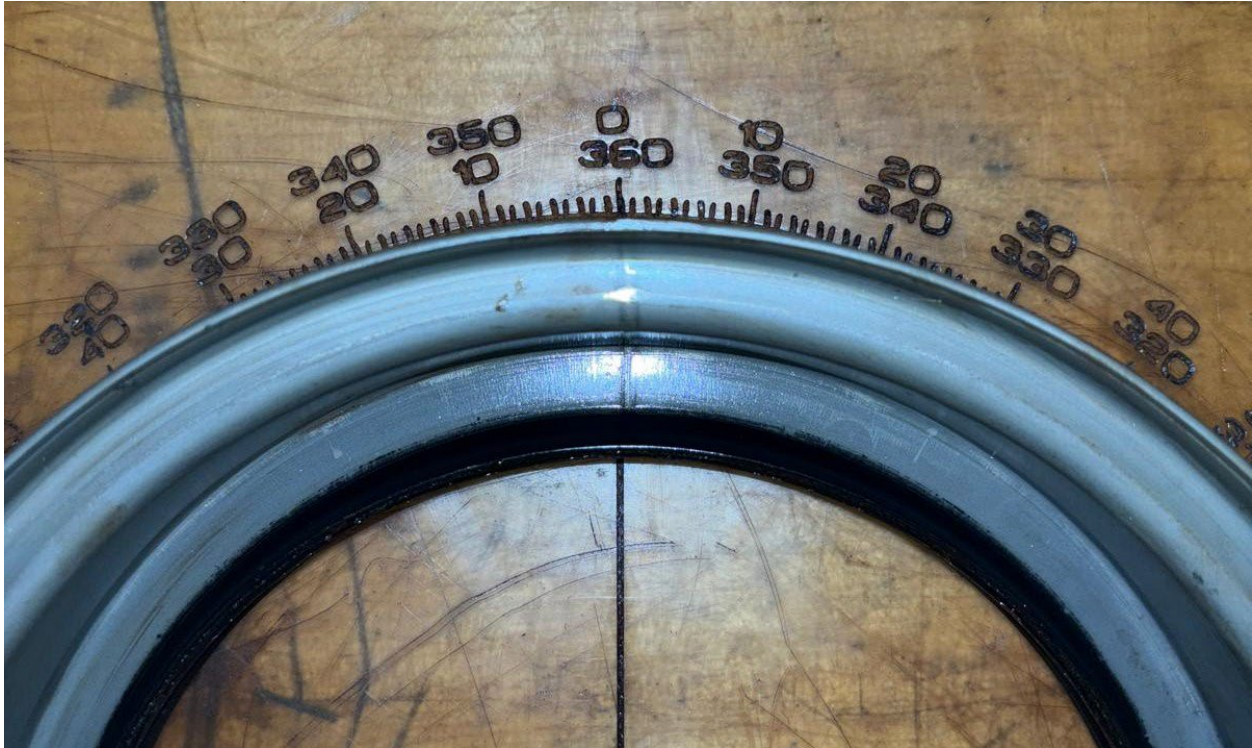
Seal weld line of Bearing R2 OB seal
